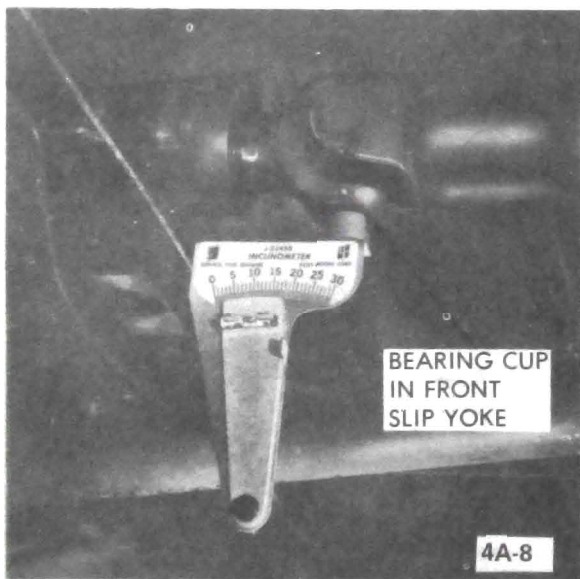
A-8 Measuring Angle at Front of Propeller Shaft
